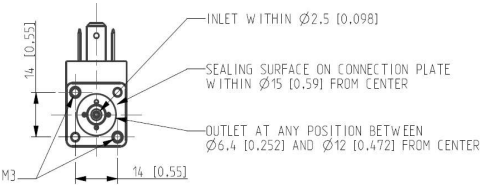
Dimensions Pad-Mount, Coil Width 20mm
